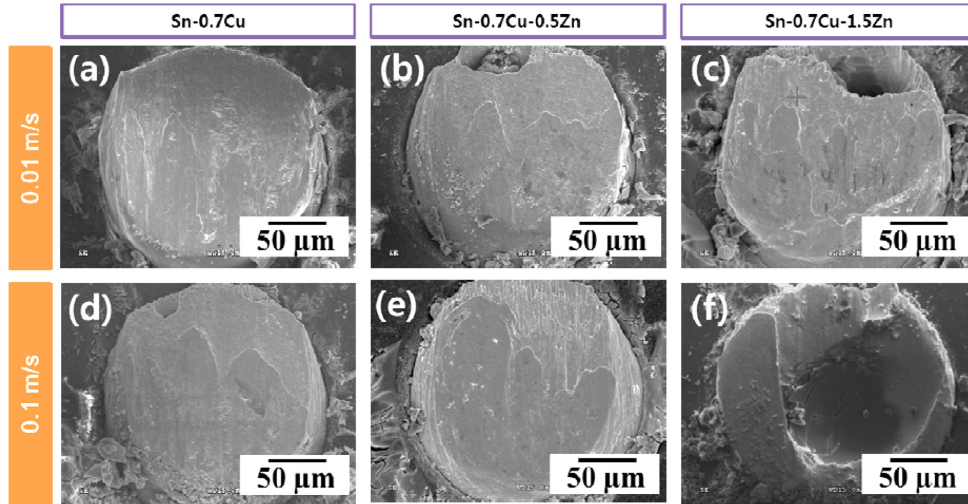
Fracture surfaces of Sn-0.7Cu-xZn/OSP solder joints after high speed shear test.
